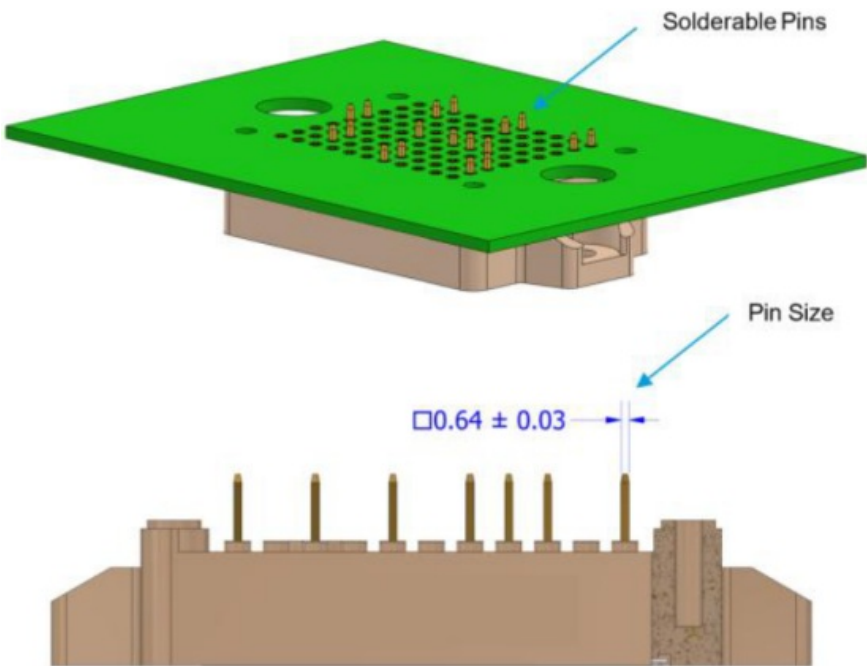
Module Mounting to PCB Prior Mounting to a Heat Sink
